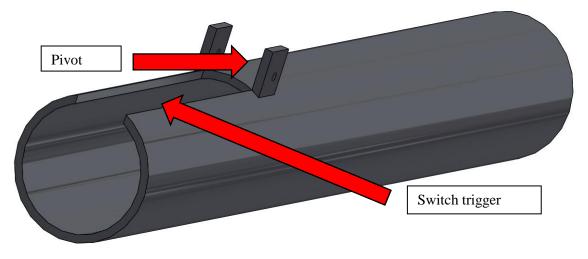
Inner Tube with Switch Trigger Mounting Tabs
